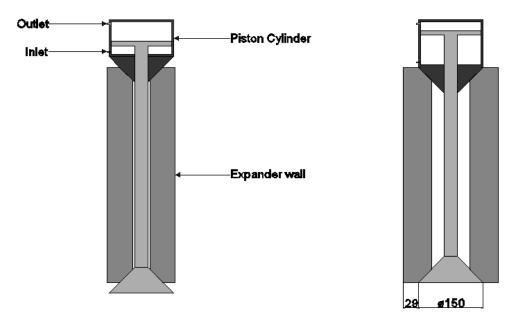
Side view - Tubing expansion tool. Left: before expansion. Right: max displacement
